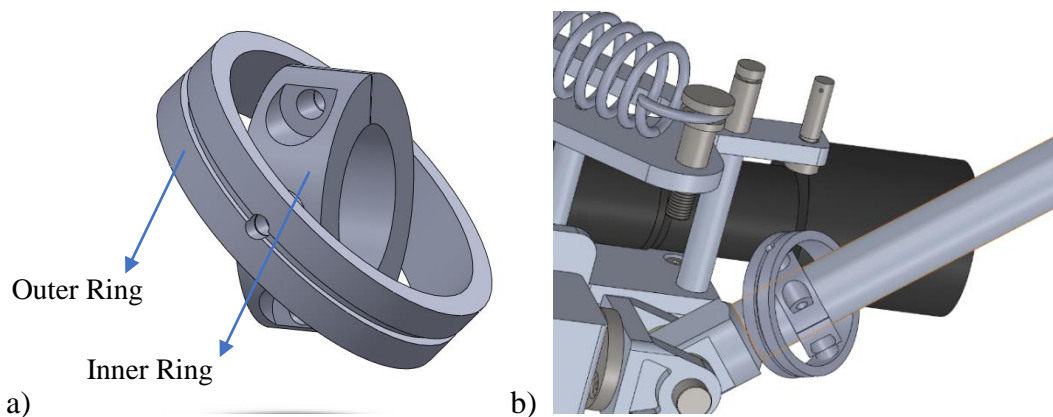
a) The connection part of the wire to the link b) the part assembled on the link
